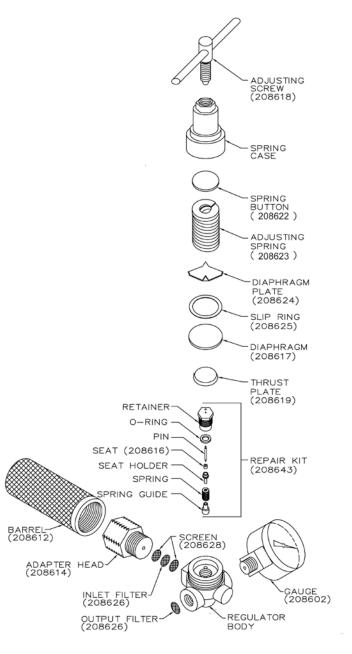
CO₂ Regulator Assembly, P/N 208615
